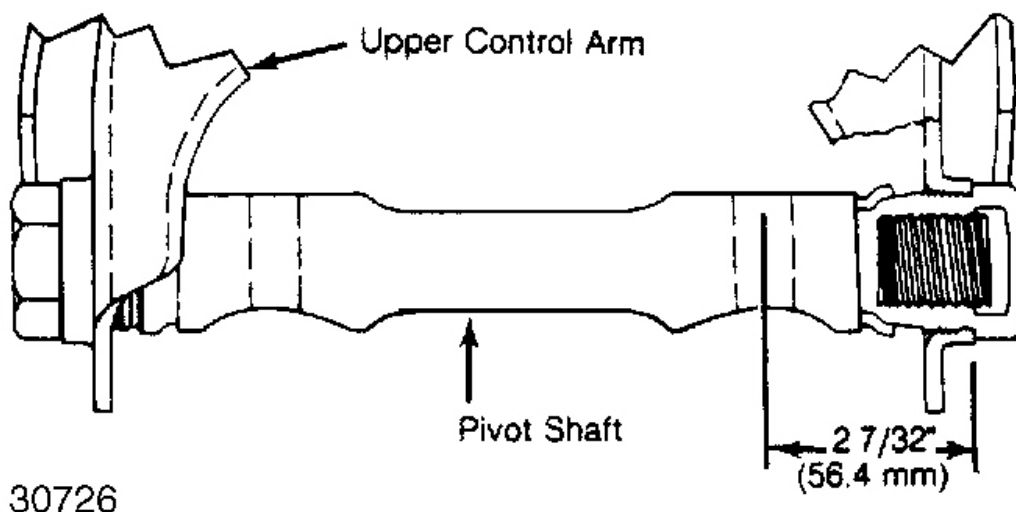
Positioning Upper Control Arm Pivot Shaft (With Steel Bushings) Ensure shaft rotates by hand after end nuts are tightened.
